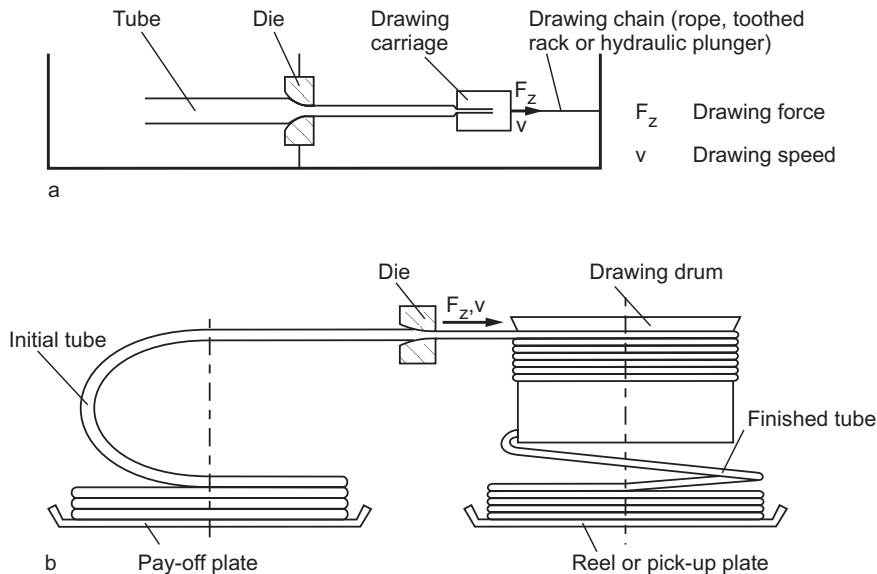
Working principles of tube drawing [15.66]. (a) drawing bench, (b) drawing machine.
